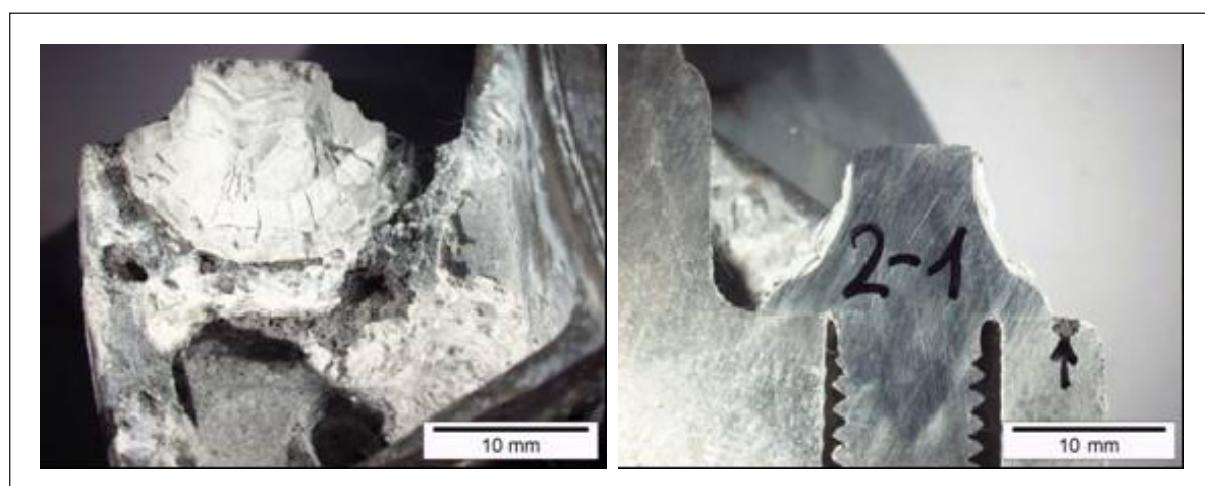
Side view and longitudinal cut of M8 EN AW 6056 after 720 hours of salt spray test
